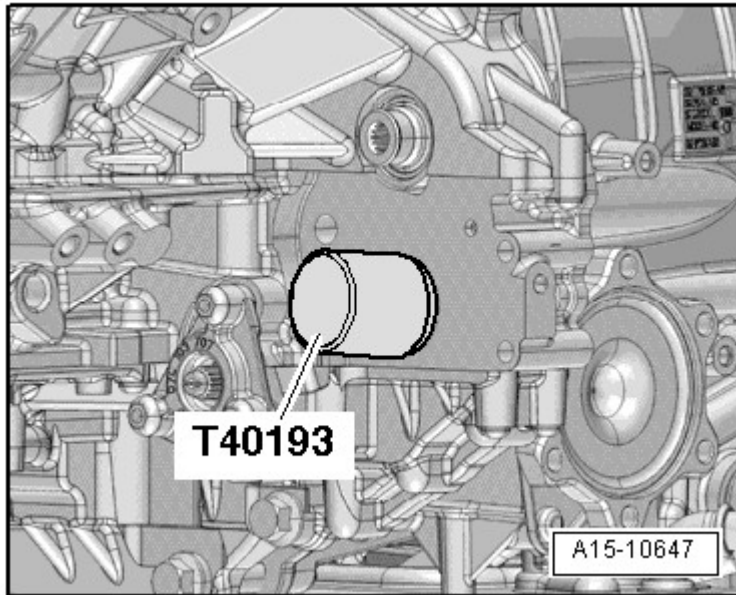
Driving Power Steering Pump Drive Shaft Seal In As Far As Stop Using T40193
